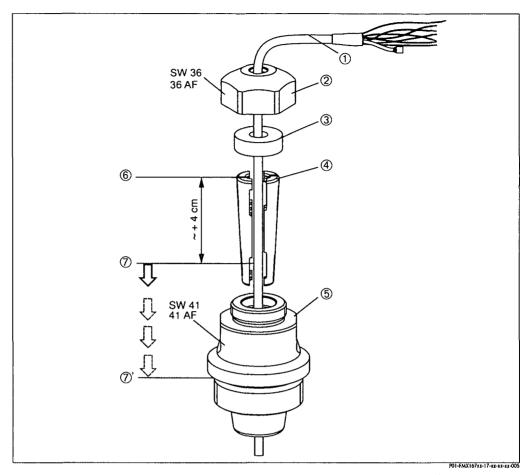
Installing the Waterpilot FMX167 with cable mounting screw, here depicted with G I 1/2 thread
